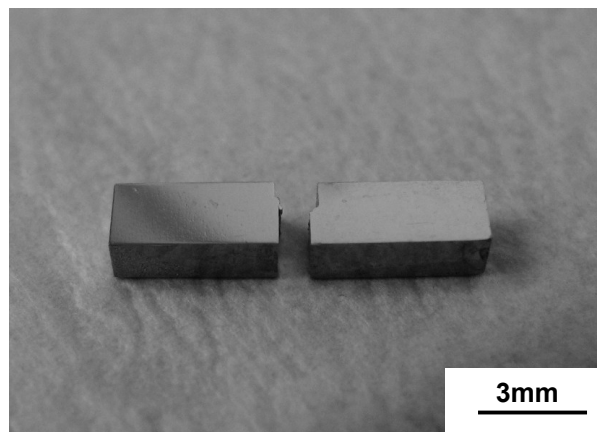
Photograph of a millimeter-sized specimen after fracture.
